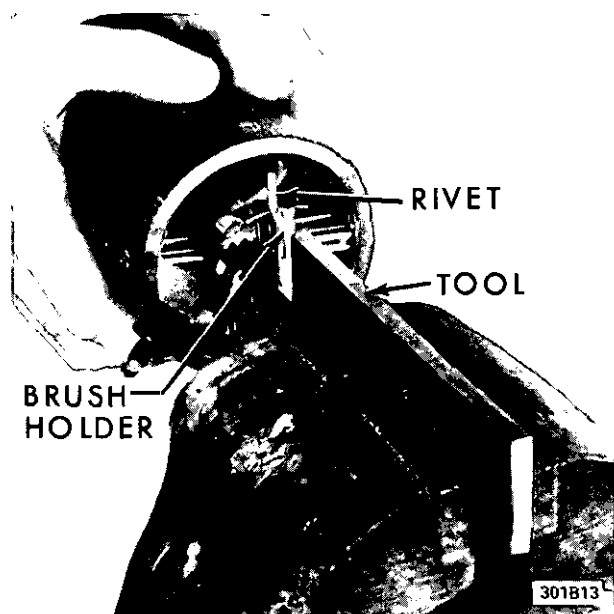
B-13 Brush Holder and Rivet Installed on Tool
